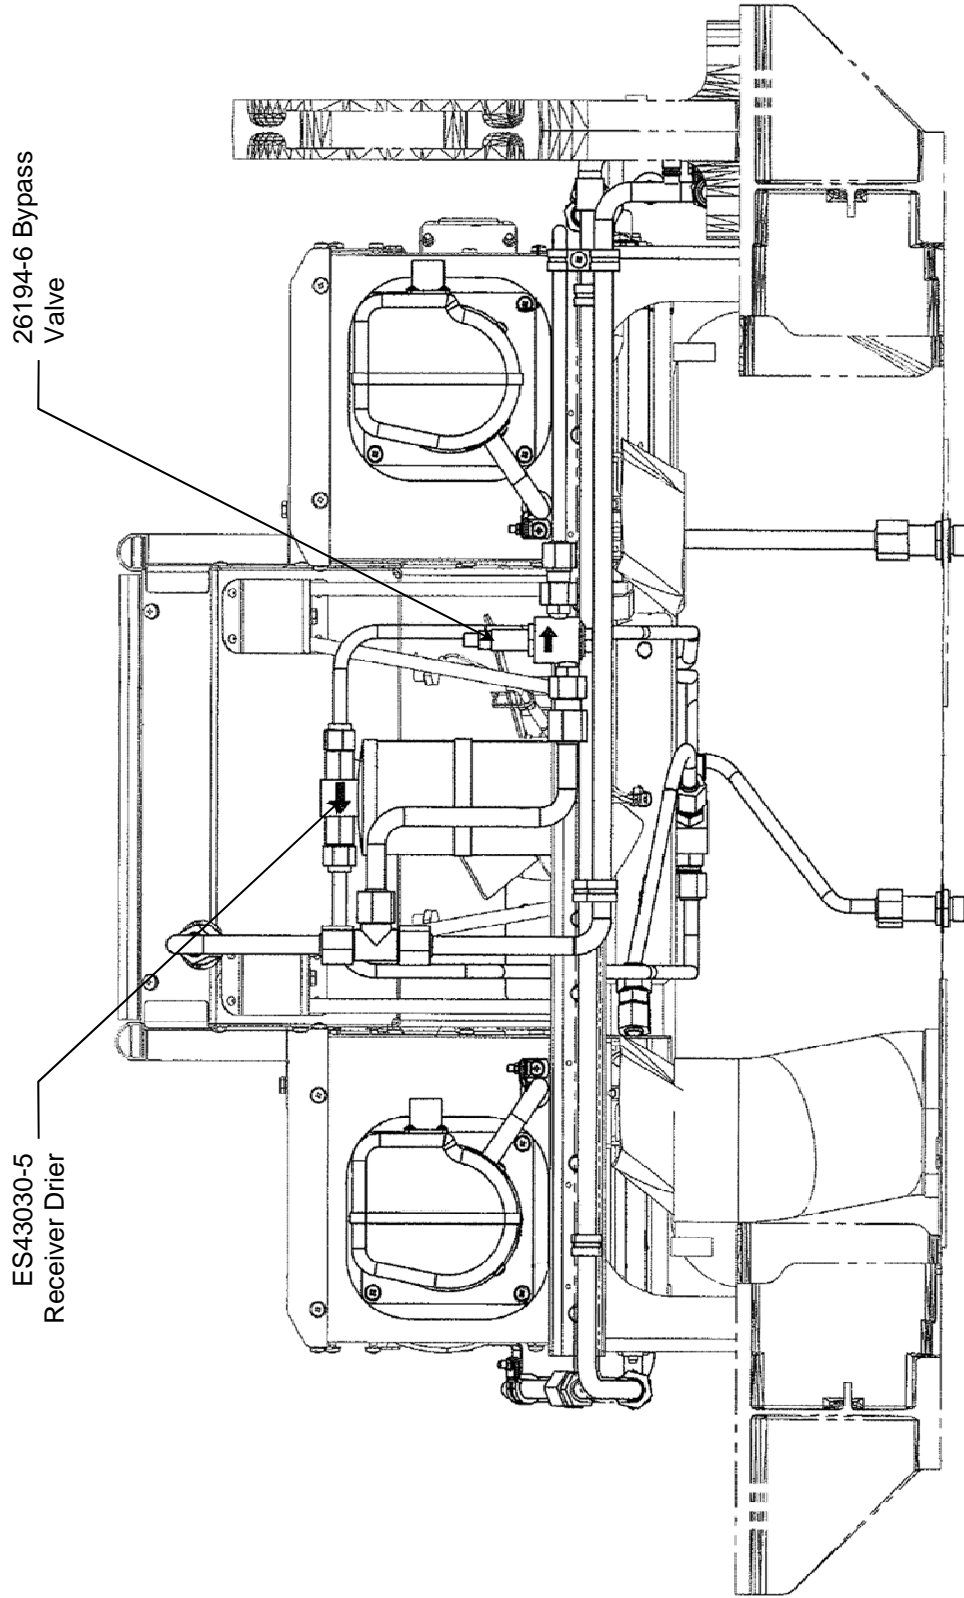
Receiver Drier and Bypass Valve Installation Detail View Looking Forward
